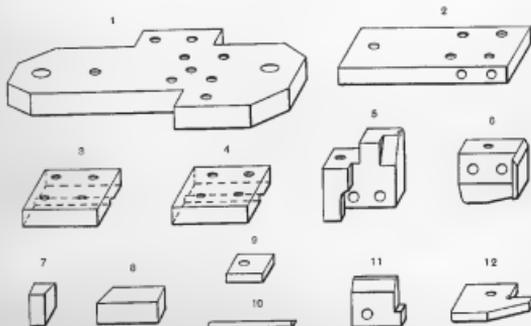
Pivotal-machine type-mould; details. Scale: half size.
